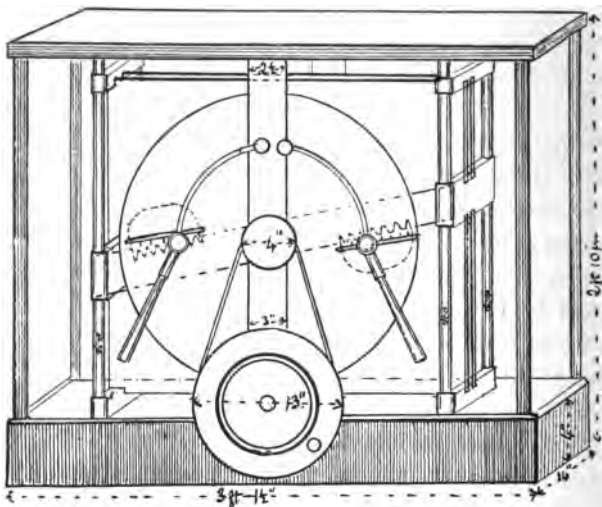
WIMSHURST-HOLTZ MACHINE.
